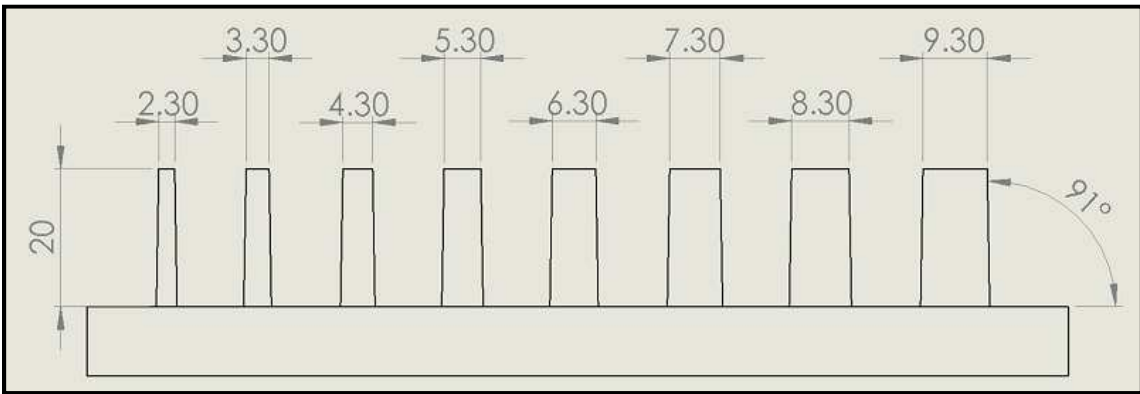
Test geometry 4: 2-D CAD drawing – with dimensions
